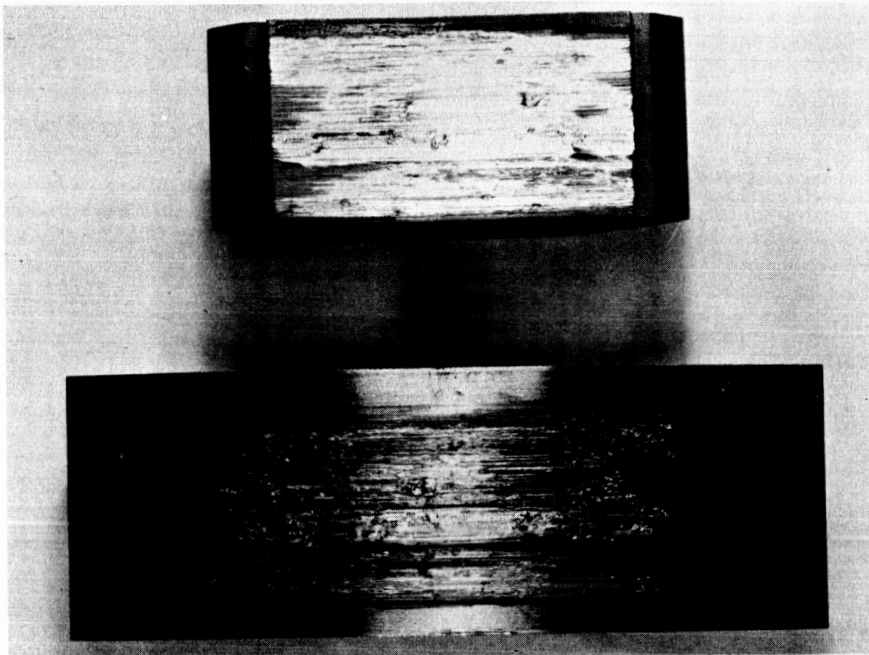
BALL JOINT TEST SPECIMEN TYPE - 13;
